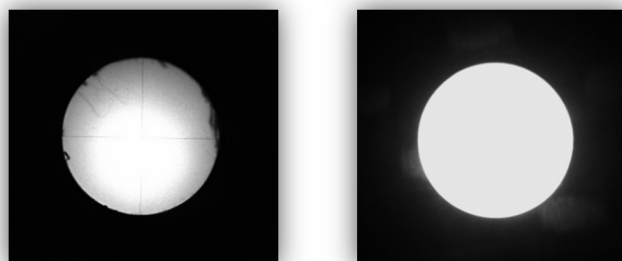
Drilled and reamed fastener hole in carbon fibre adherend with no back-face plate (left) and with back-face plate (right)
